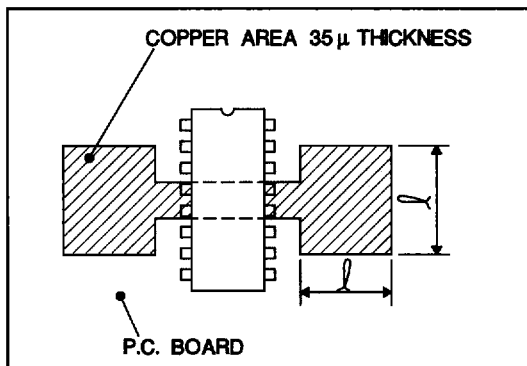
Example of P.C. Board Copper Area which is used as Heatsink
